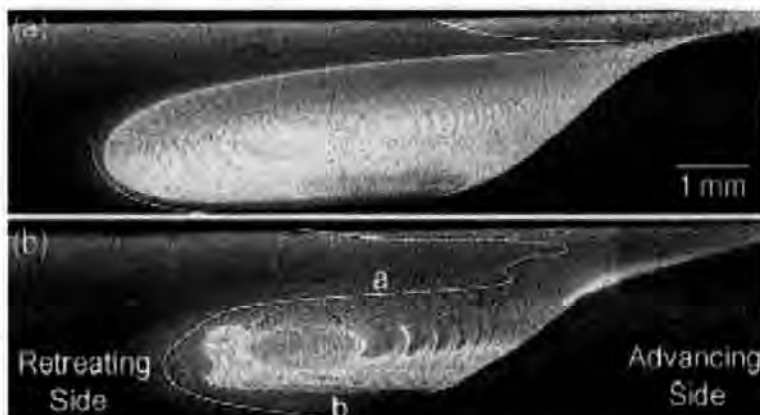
Lines indicating remnants of the weld line<sup>4</sup>.
